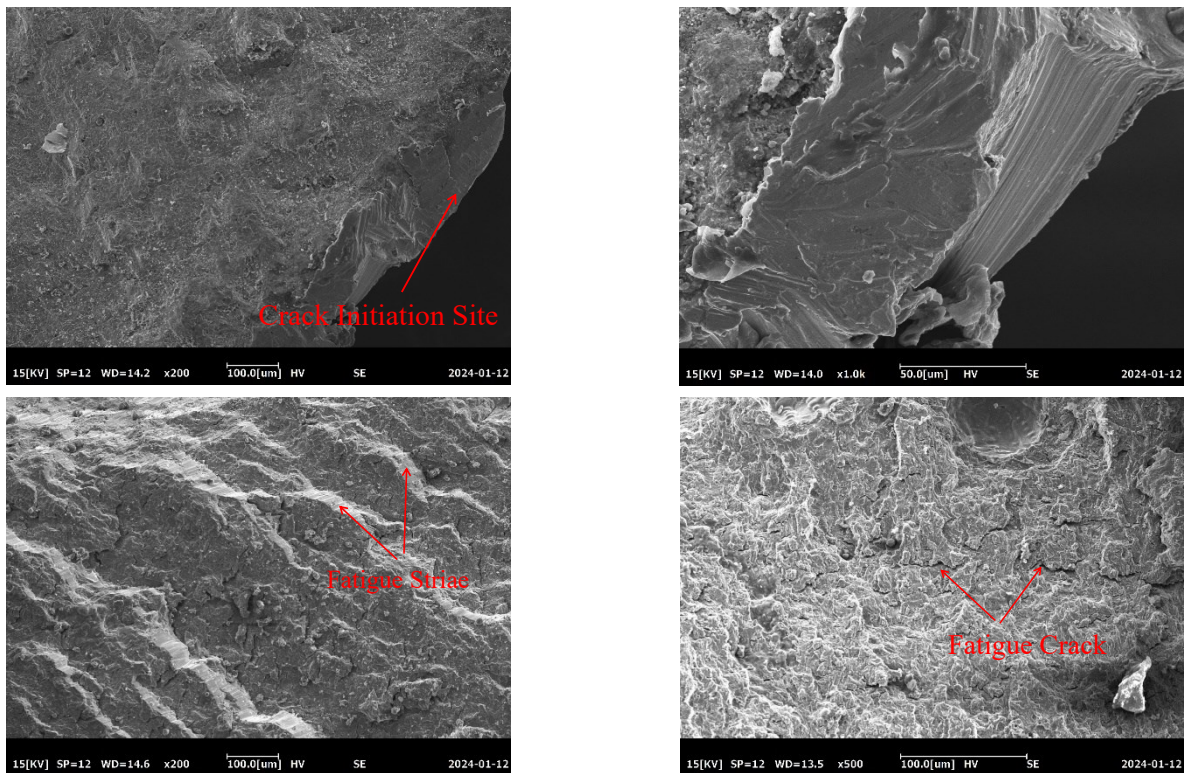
Microscopic view of fatigue fracture surface
